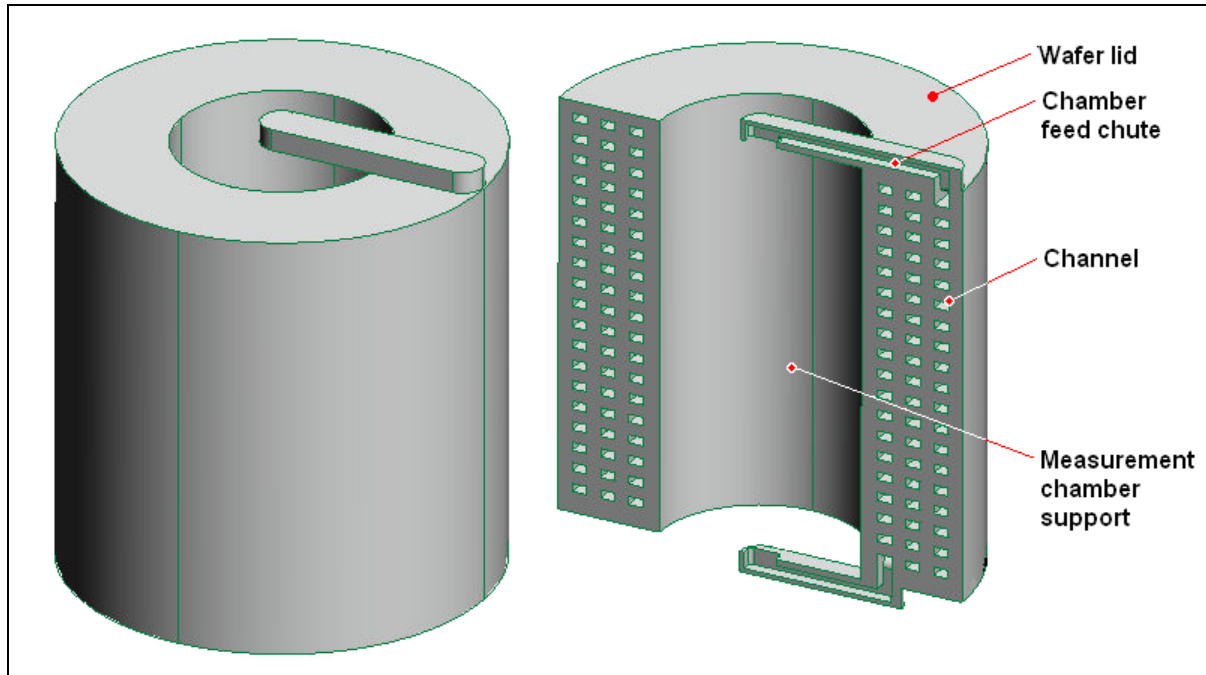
Set of bonded wafers showing the top and bottom chamber feed chutes. Half-sectioned view on the right shows channel detail.
